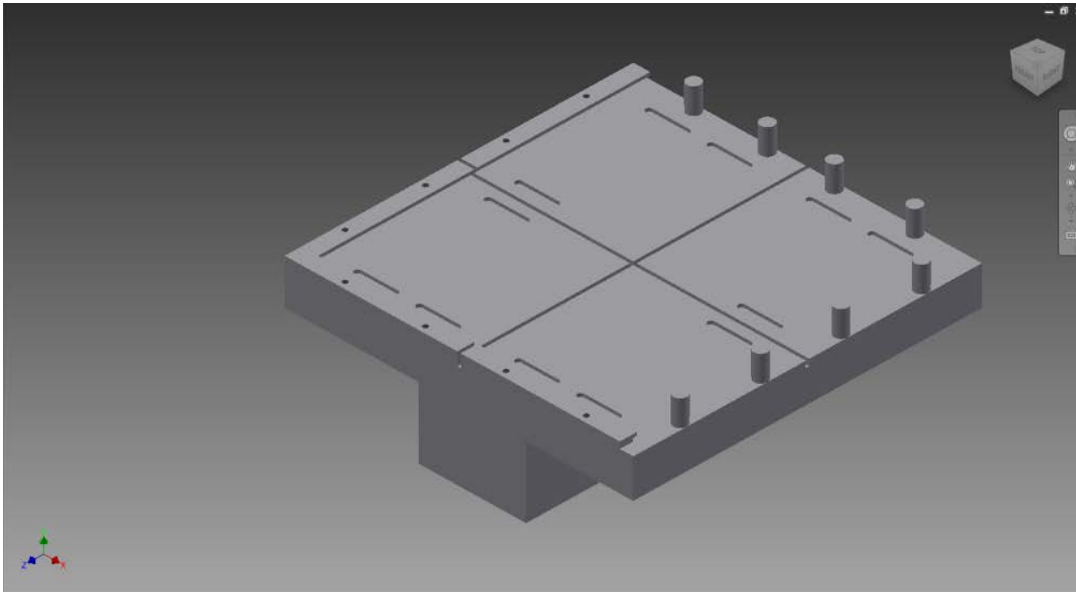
Figure A– Fixture Design rendered in 3-D Autodesk Inventor
